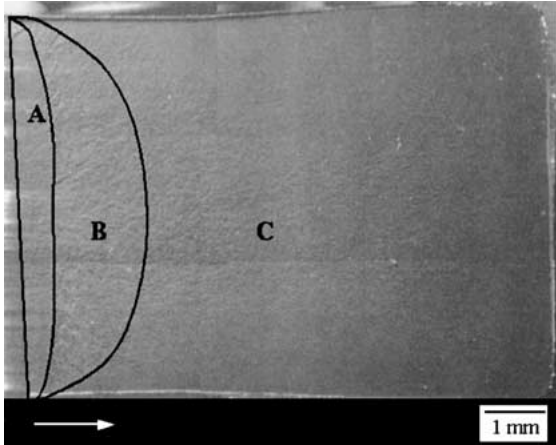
Fracture surface morphology of a Charpy impact test specimen; (A) fracture induction area, (B) rough zone and (C) smooth surface. The arrow indicates the crack propagation direction.
